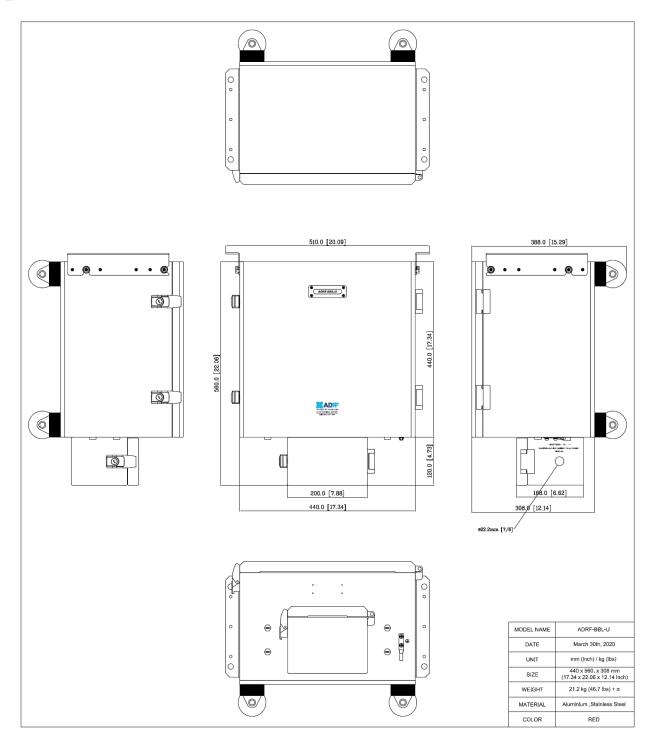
ADRF-BBL-U Mechanical Drawing
